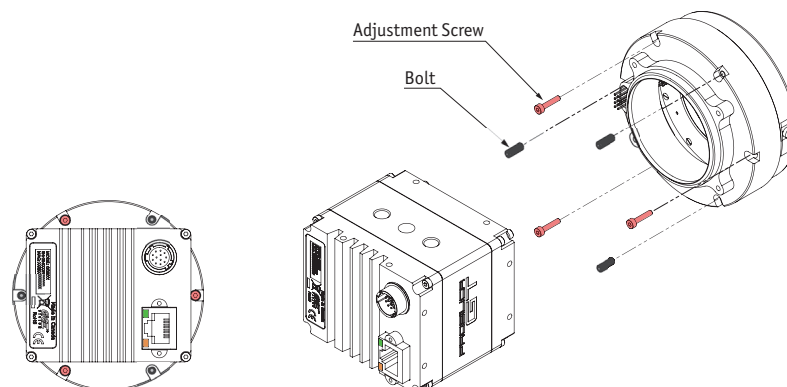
Back view (*left*) and exploded view (*right*) of Prosilica GT1930L camera assembly showing the adjustment screws and bolts in the EF-Mount
